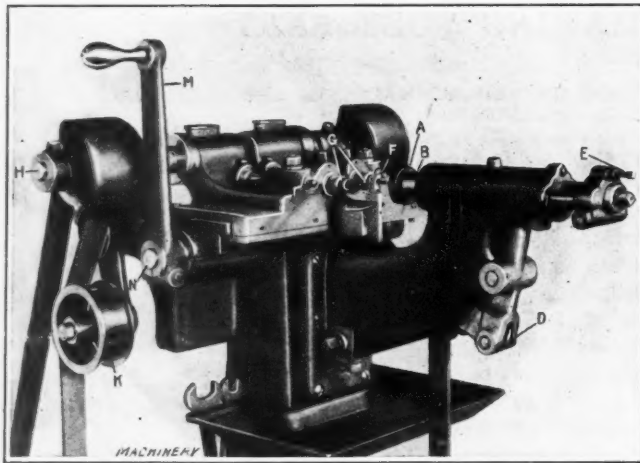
Detail of Spindle and Operating Mechanism on Duplex Milling Machine for Closing Cap
